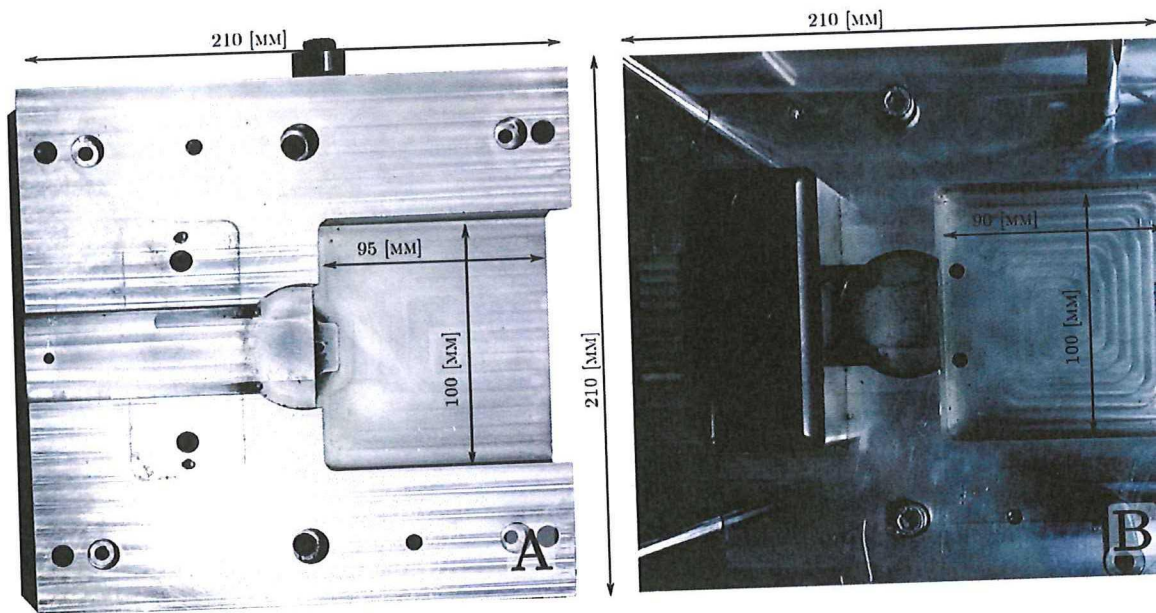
| Two different bottom plates for the: A) 9109 jig (steel bottom plate), B) 9110 (aluminium bottom plate), showing the clamping block of the bottom sample and the 4 poles on 9110 which are interchangeable with jig 9109
